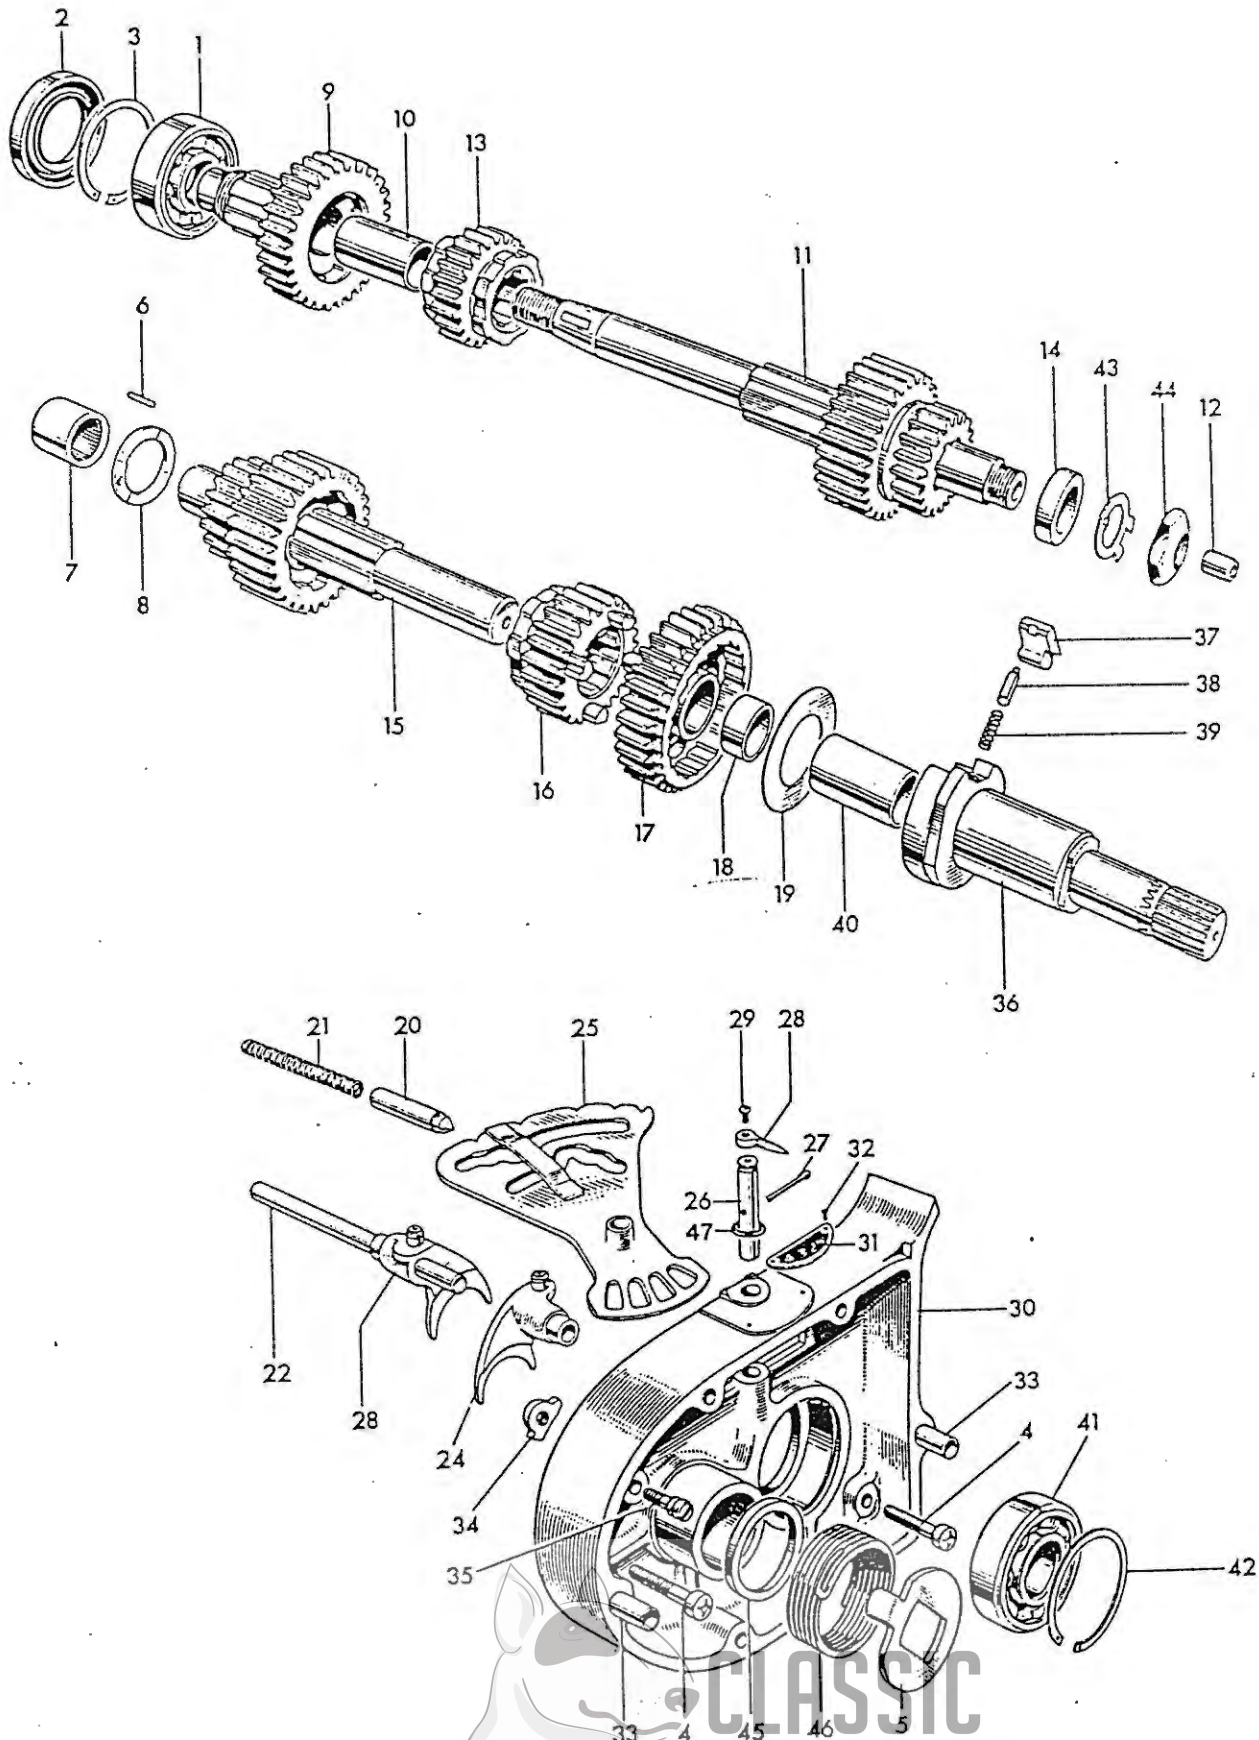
GEARBOX SHAFTS, BEARINGS AND INNER COVER
